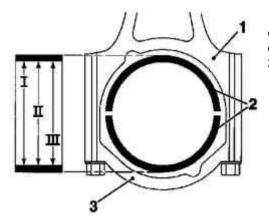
Replacing some types of bearings: 1 - connecting rod 2 - connecting rod bearing inserts, and 3 - connecting rod bearing cap
